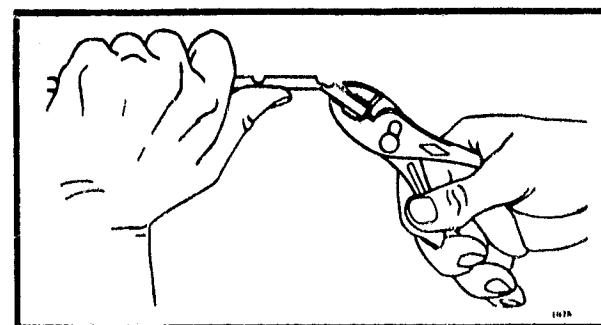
REMOVING EXCESS BULB SUPPORT.
